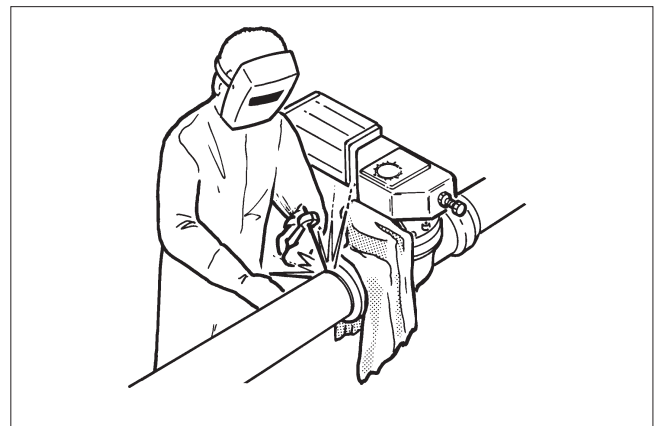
Valve body covered with wet protection cloth during welding
